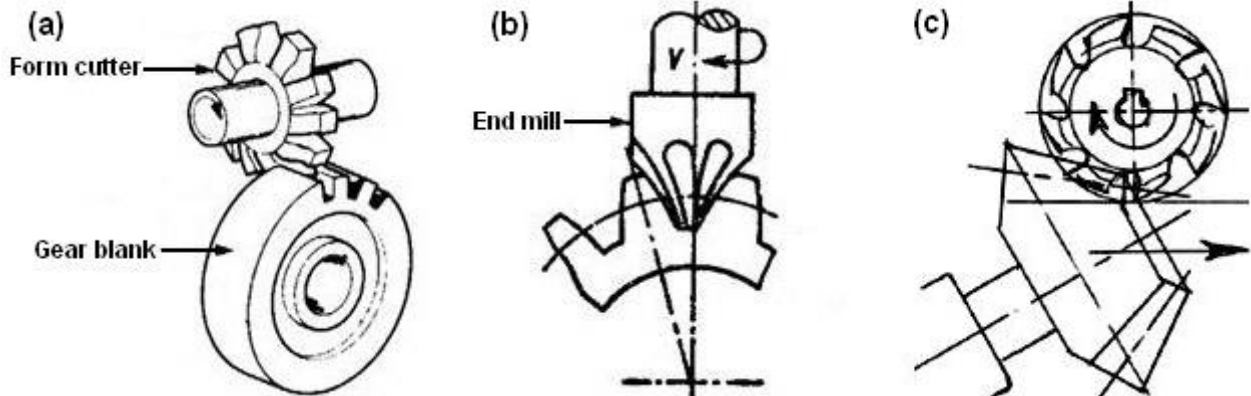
(a) Cutting teeth of spur gear by disc type cutter (b) Cutting teeth of spur gear by end mill (c) Cutting teeth of straight toothed bevel gear by disc type cutter
